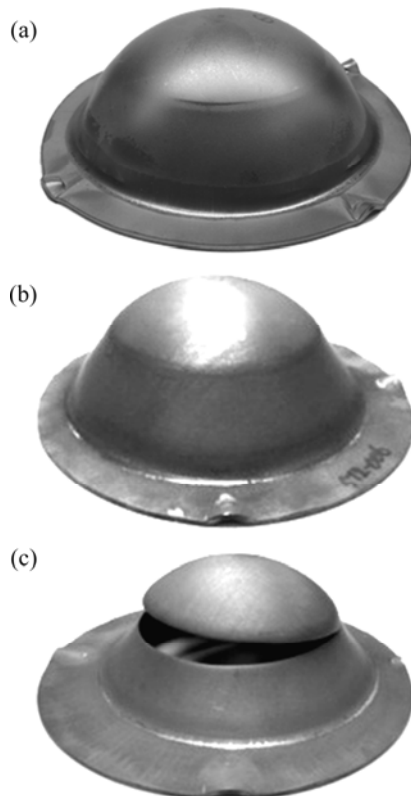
Cold and hot-stamped parts: (a) Cold stamping, 26 mm/s; (b) Hot stamping, 149 mm/s; (c) Hot stamping, 26 mm/s
